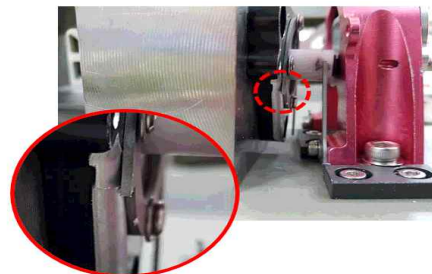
Fatigue Fracture of the Blade after Sine Vibration Test
